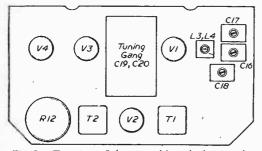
Top view of the printed board, showing the position of the trimmers and major components.
